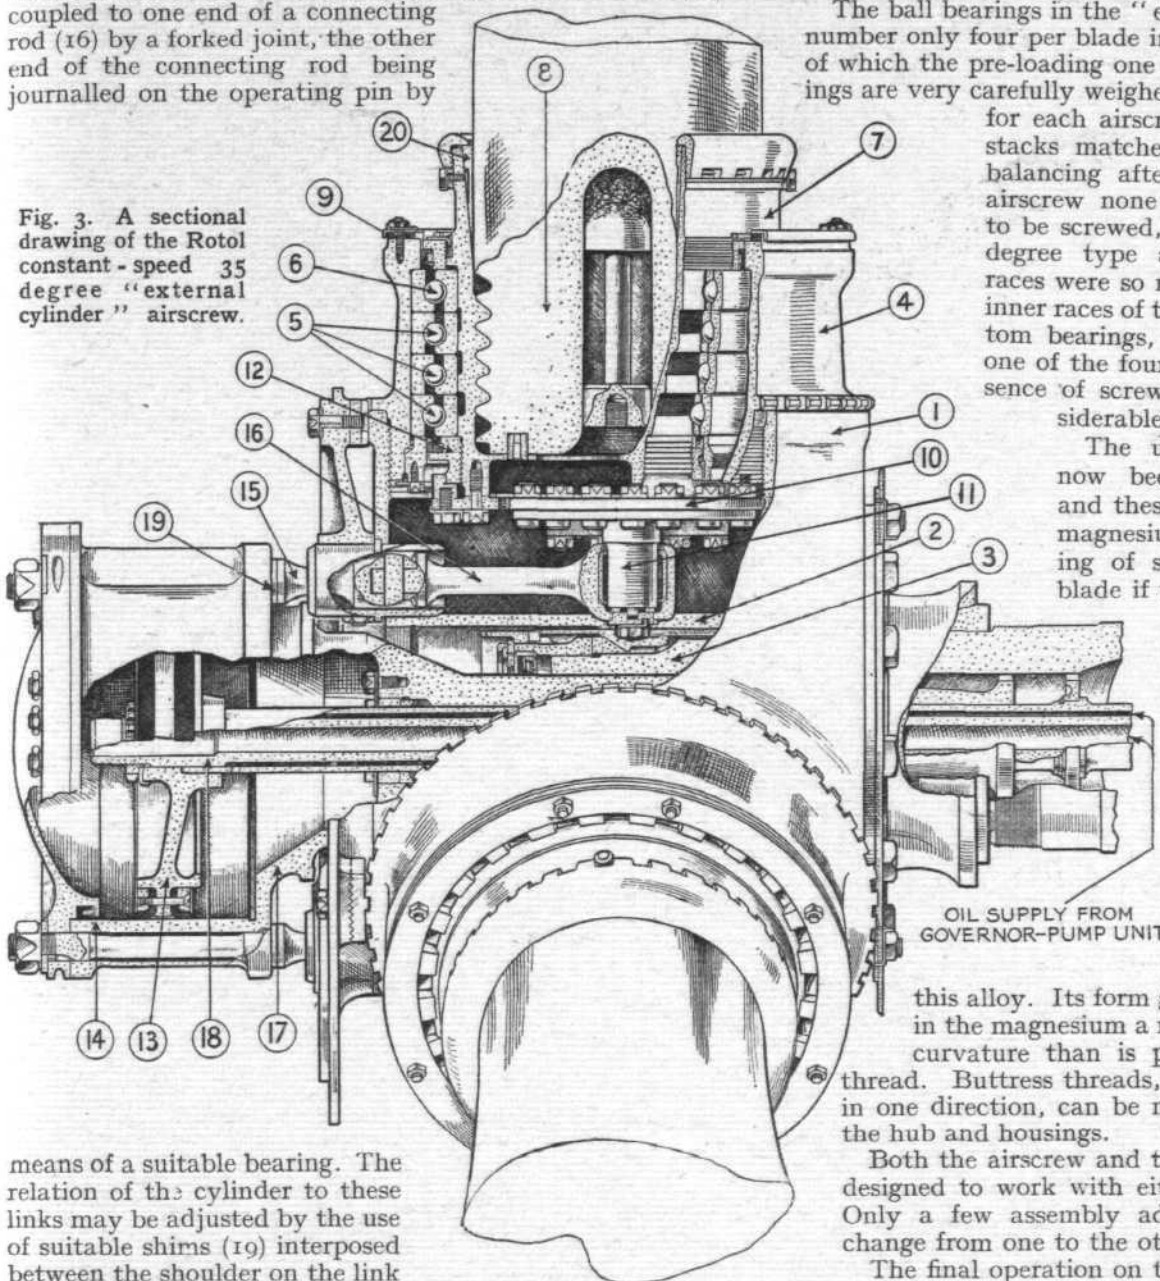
A sectional drawing of the Rotol constant-speed 35 degree "external cylinder" airscrew.
